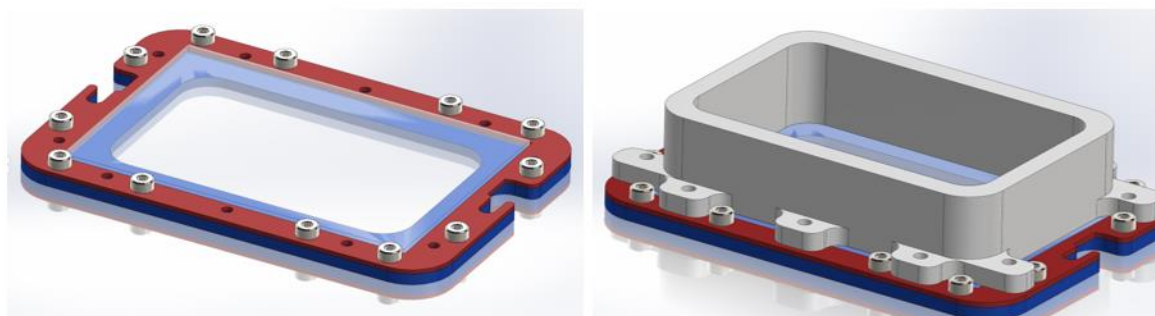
Schematics of resin chamber, with base assembly on left and fully assembled chamber on right.
